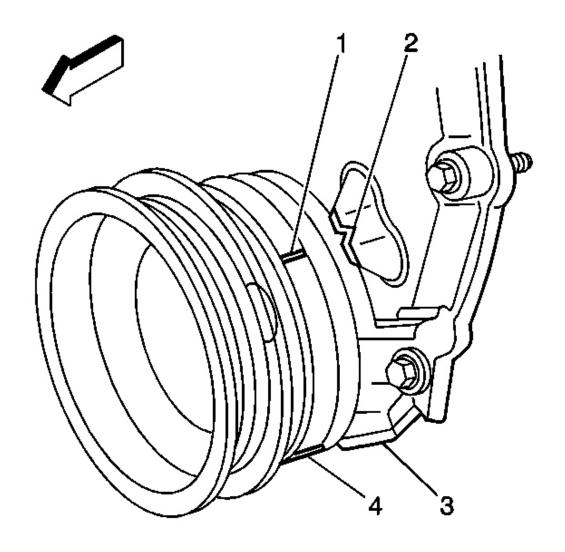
View Of Crankshaft Balancer Alignment Mark & Engine Front Cover Alignment Tab
